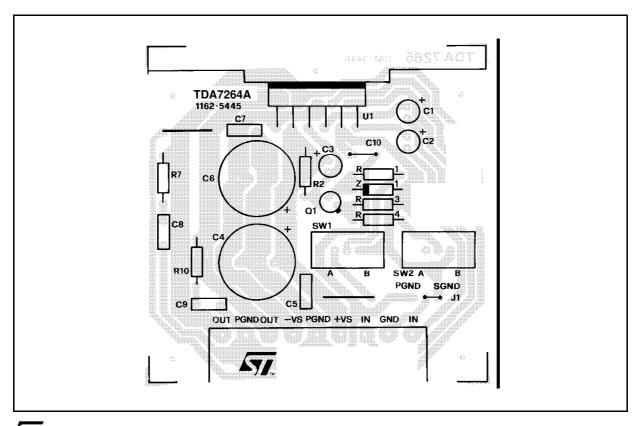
P.C. Board And Component Layout of the Demo Board Schematic TDA7264A (1:1 Scale)
